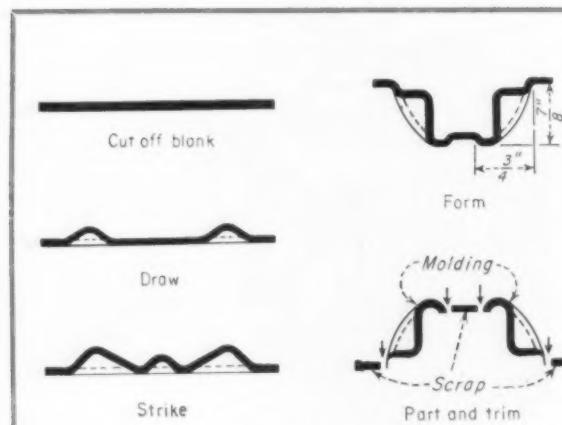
Severe brake forming is possible with 430. Sequence shows forming of refrigerator shelf support.
